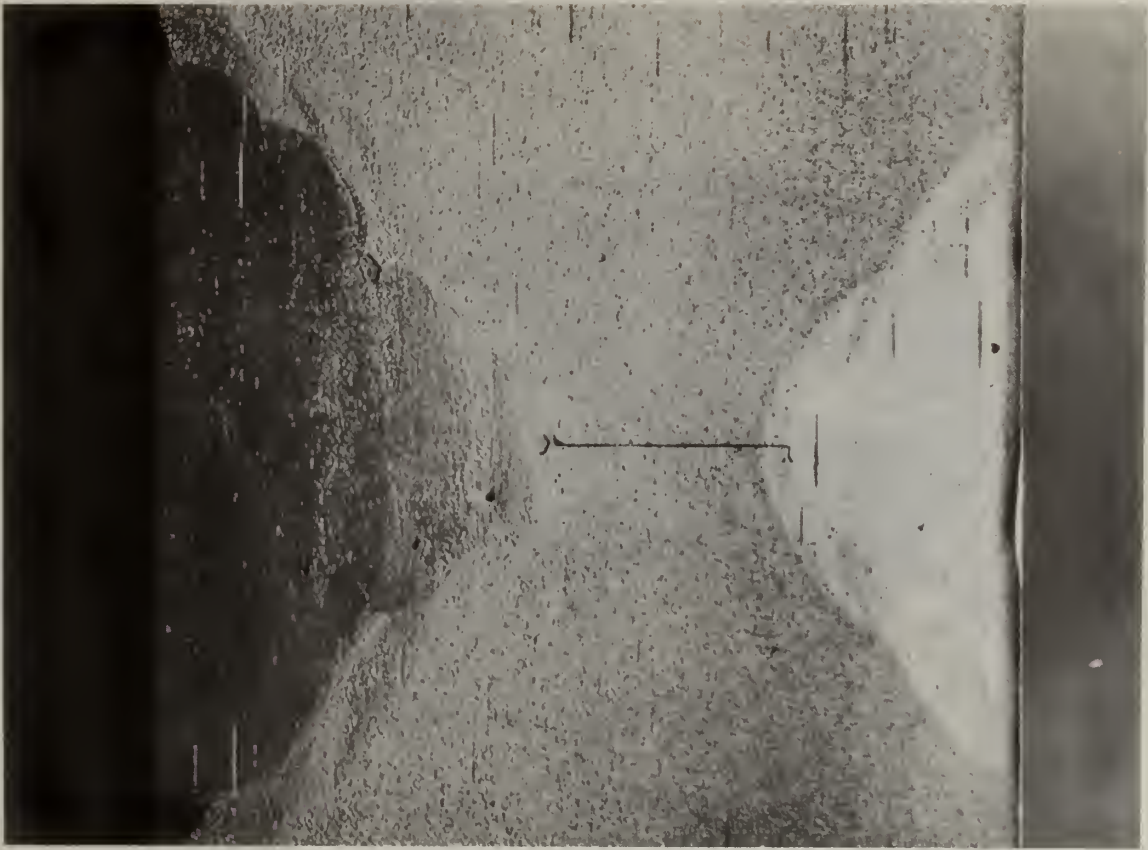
Cross Section of Machined Specimens With Normal and 45° Inwelded Cracks
